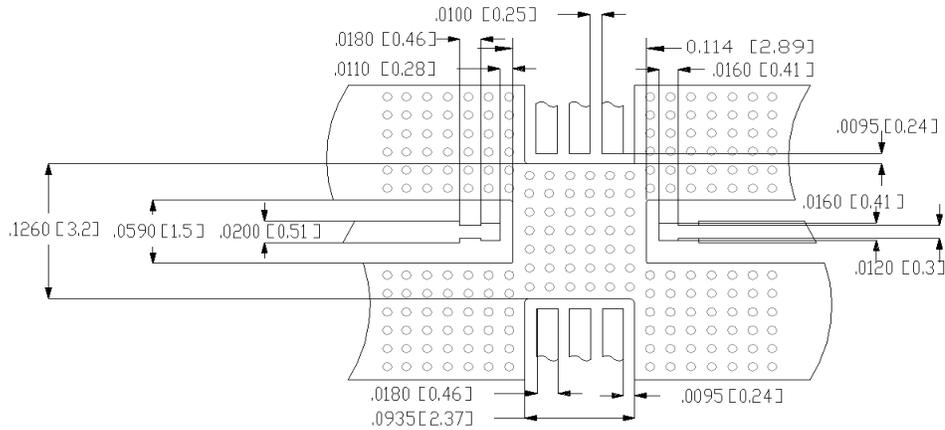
Suggested PCB Land Pattern and Stencil Layout
